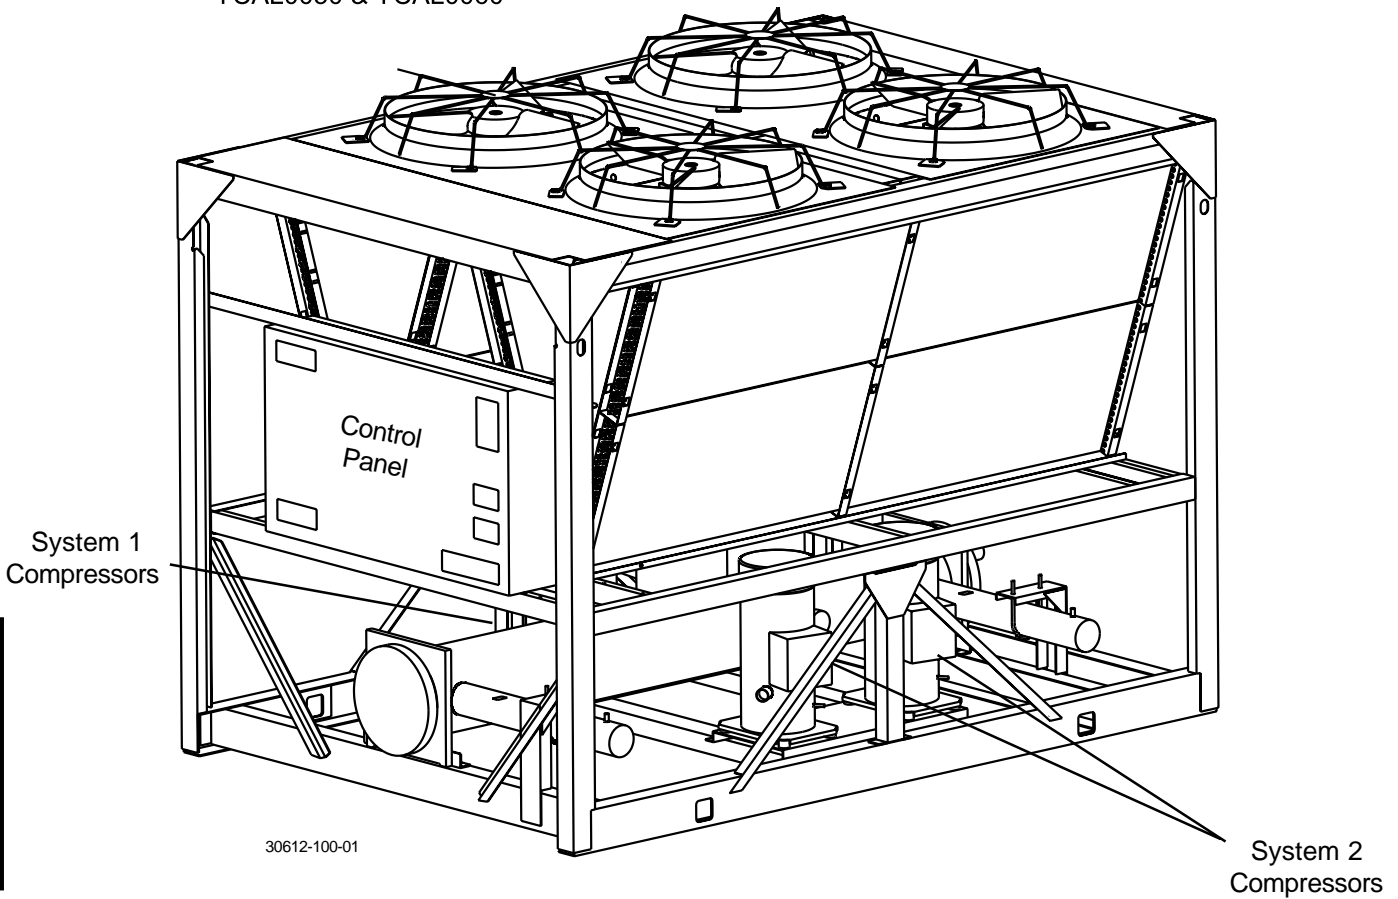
COMPRESSOR - TYPICAL LAYOUT (REF. TABLE 6, PAGE 18)
